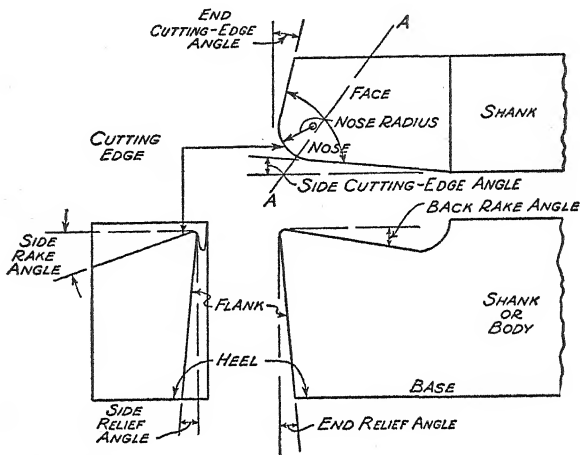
A Right-Cut, Straight-Shank, Single-Point Tool with a Straight Cutting Edge as Ground on a Bar of Tool Steel.
